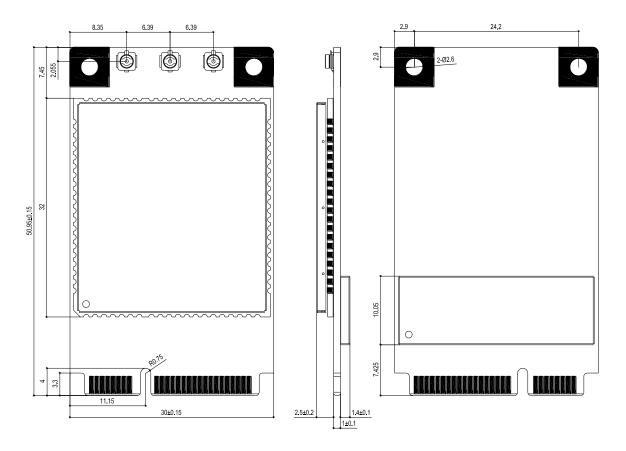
Mechanical Dimensions of EC200A Series Mini PCIe
